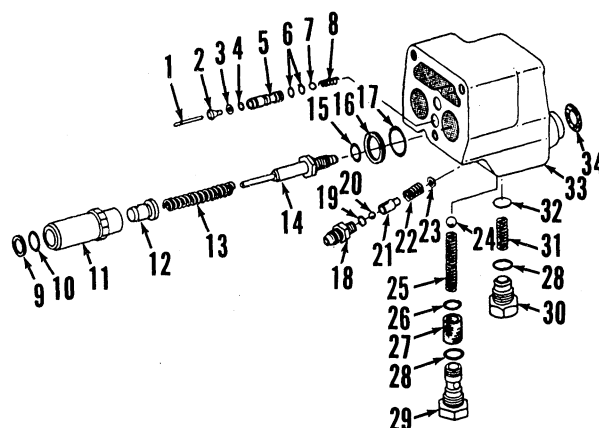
Exploded view of brake valve with cover removed. Operating parts shown are for right brake.
